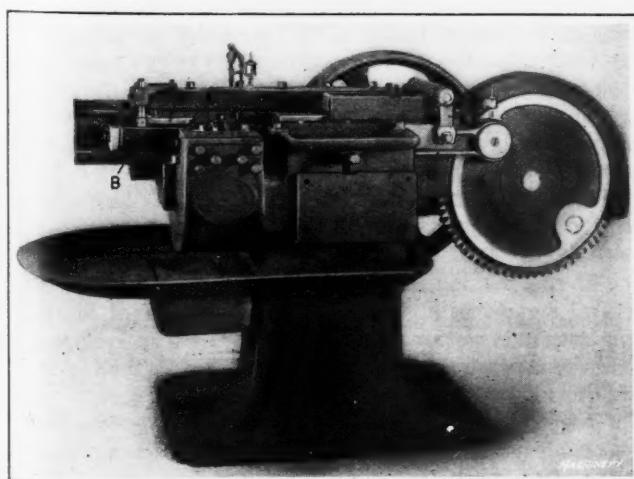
Reciprocating Type of Screw-thread Rolling Machine arranged for feeding Blanks to Dies by Hand
